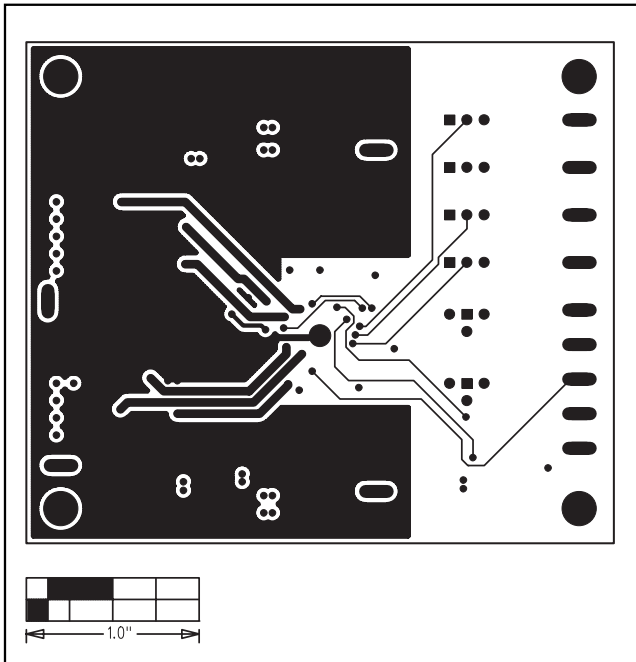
MAX8744A EV Kit PCB Layout—Layer 2
